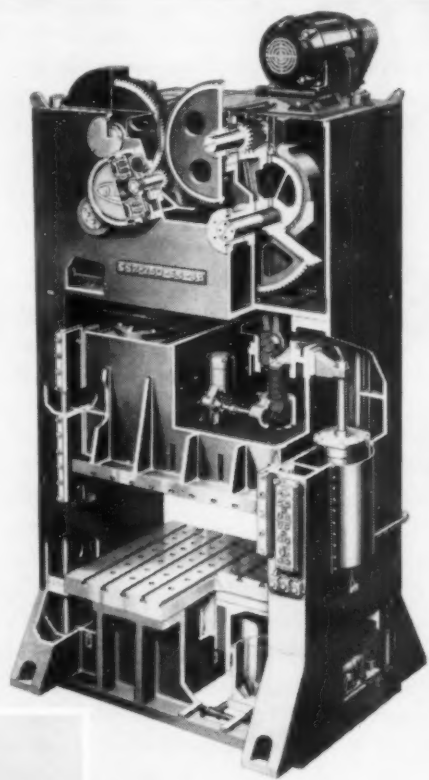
Cutaway view of a Danly straight side press, showing in color automatic lubrication metered to each gear, bearing and connection of the crown and slide.
